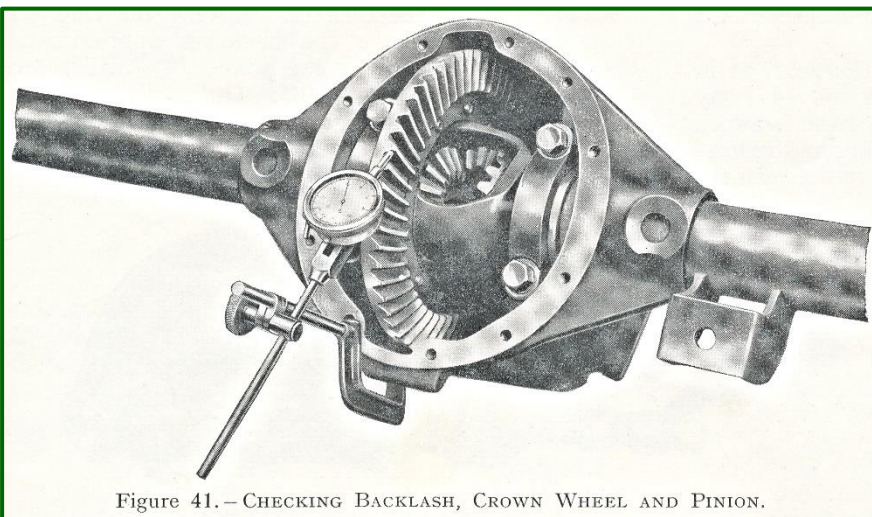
CHECKING BACKLASH, CROWN WHEEL AND PINION.
